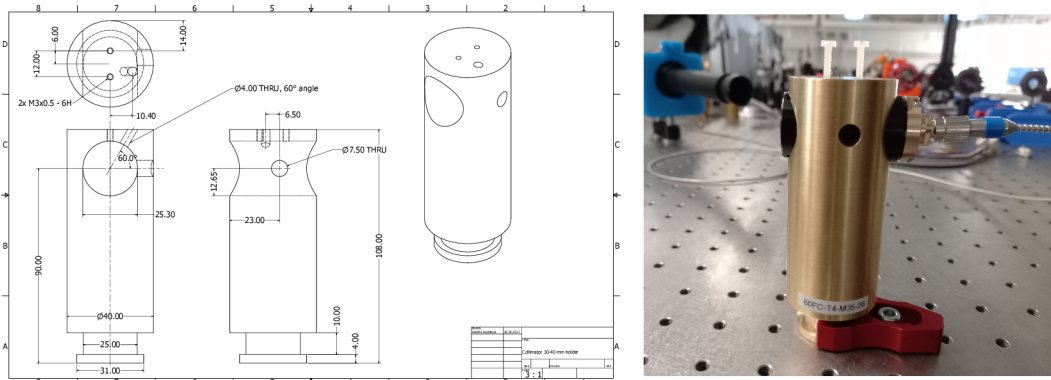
Drawing of the custom holder for a 35 mm collimator and the fabricated product.
